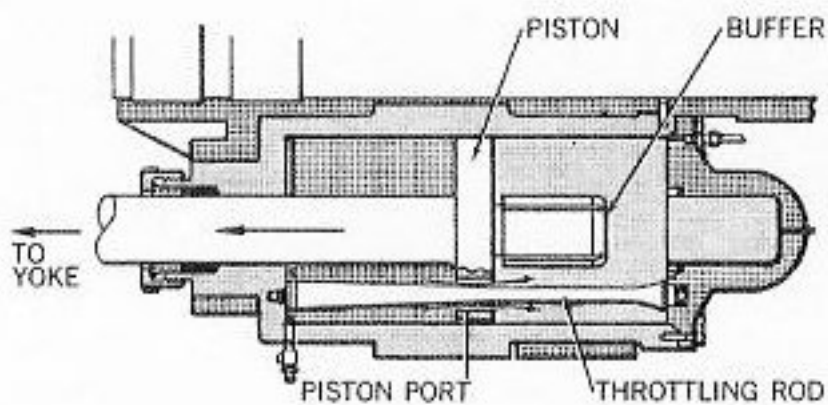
B. 16-inch Gun Assemblies. Gun Recoiling Action.
